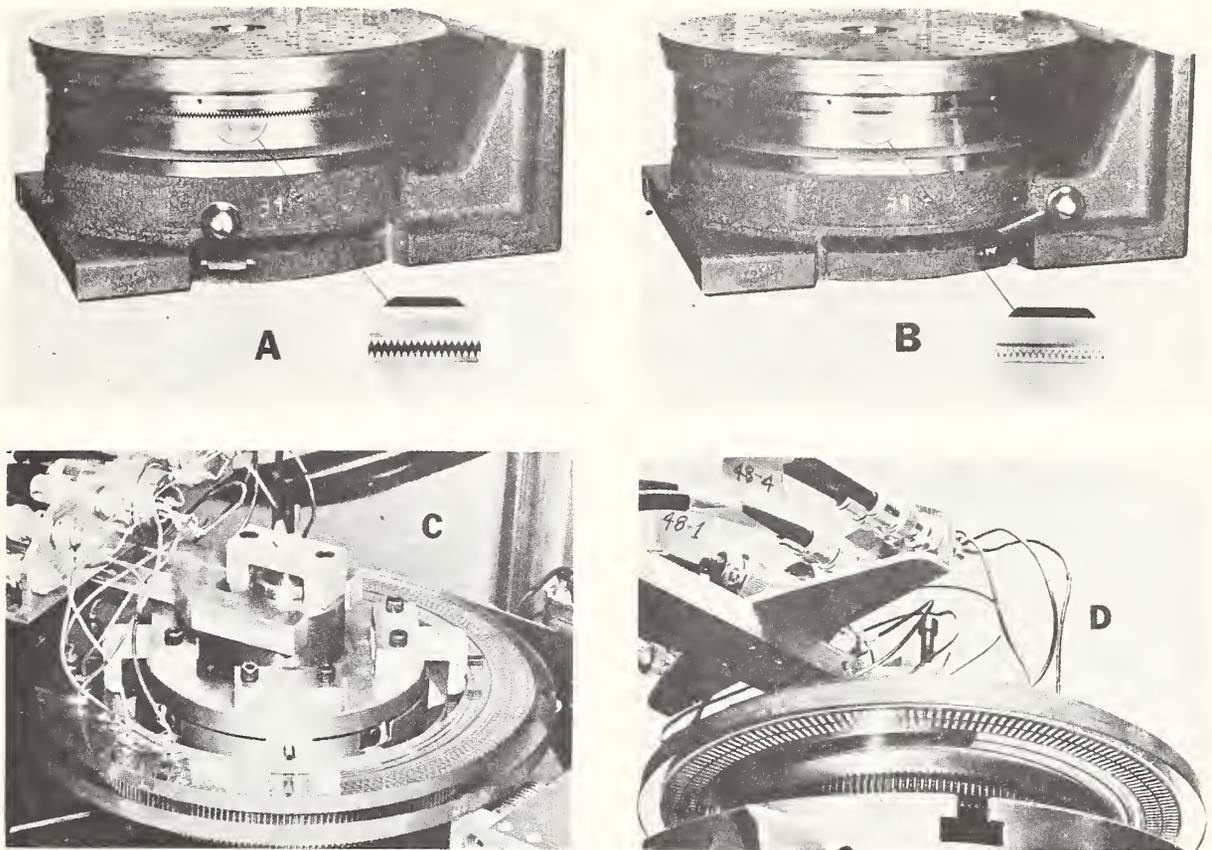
Averaging principle applied to angle measurement. Mechanical fixture shown open for free rotation (A) and locked in position (B). (Courtesy of AA Gage Co.) Transducer discs showing driver (C) and coupler (D). (Courtesy of Telecomputing Services, Inc.)
